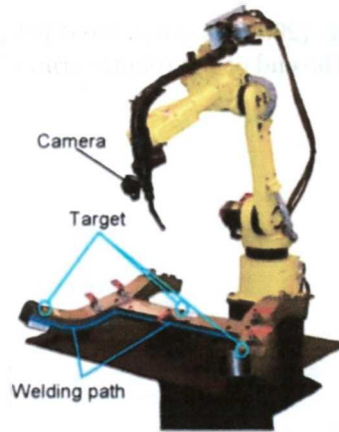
Arc welding system using ARC Mate 120iBe
